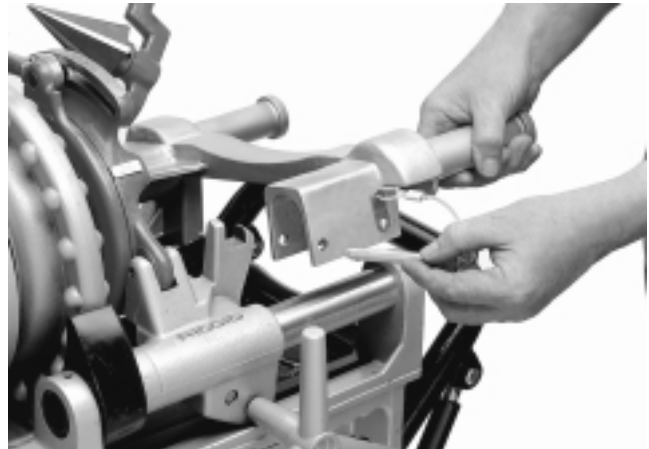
Locking Pin On 916 Roll Groover Adapter Bracket
